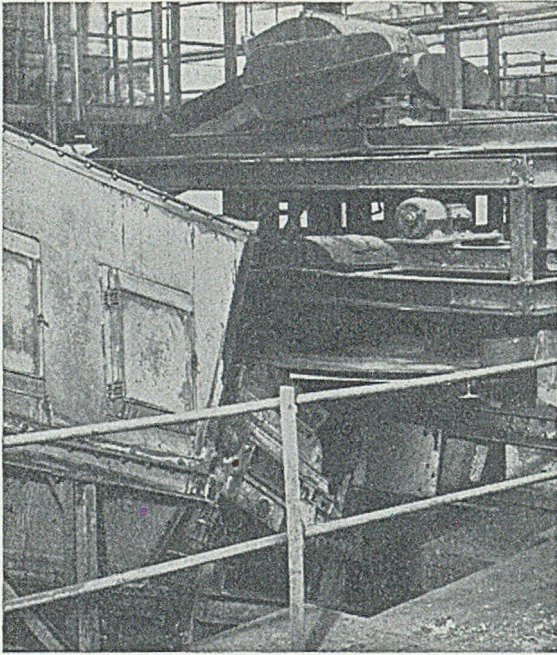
Continuous Sand Mill at the Discharge Point into the Royer which delivers on to a Conveyor Belt 30 in. wide.
